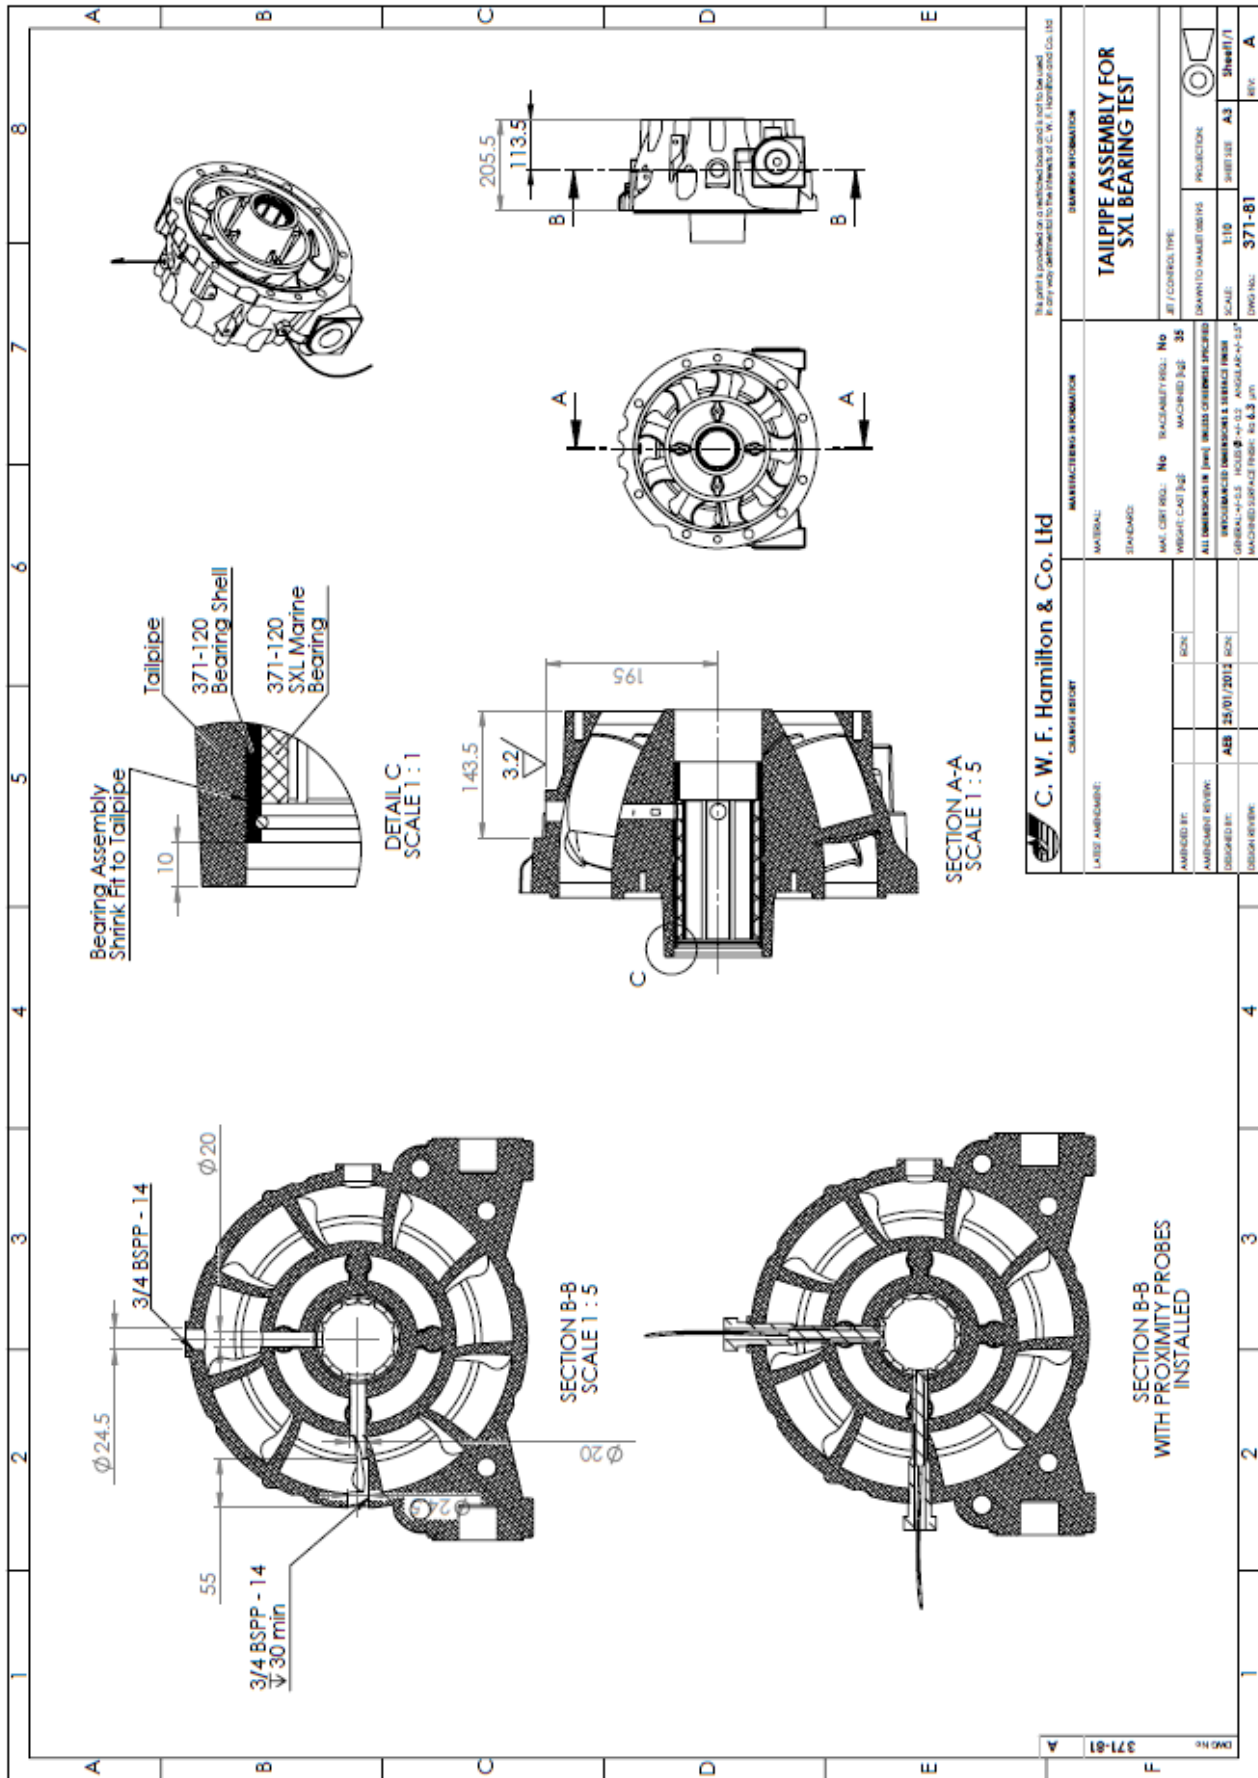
Drawing of SXL Marine Bearing Fitted to Tailpipe
